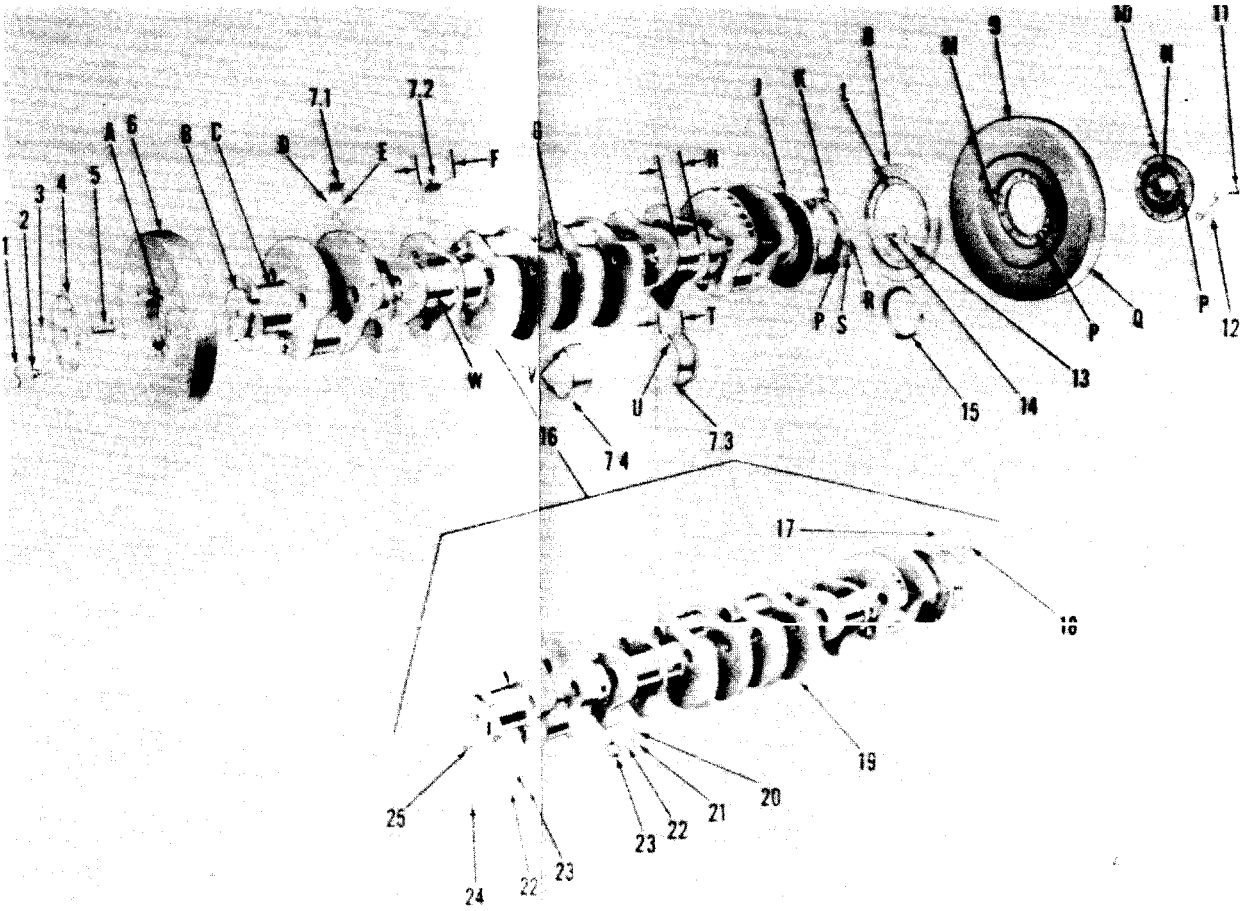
Crankshaft Assembly, Flywheel Damper, Bearings and Associated Parts-Exploded View.
